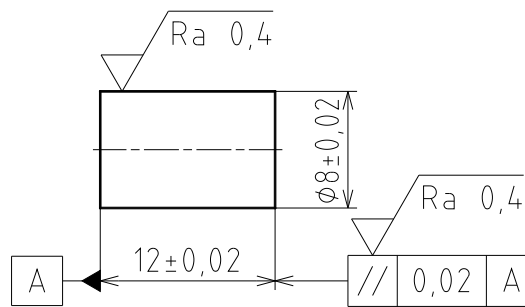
Detailed drawing of the cylinder for upsetting tests.
